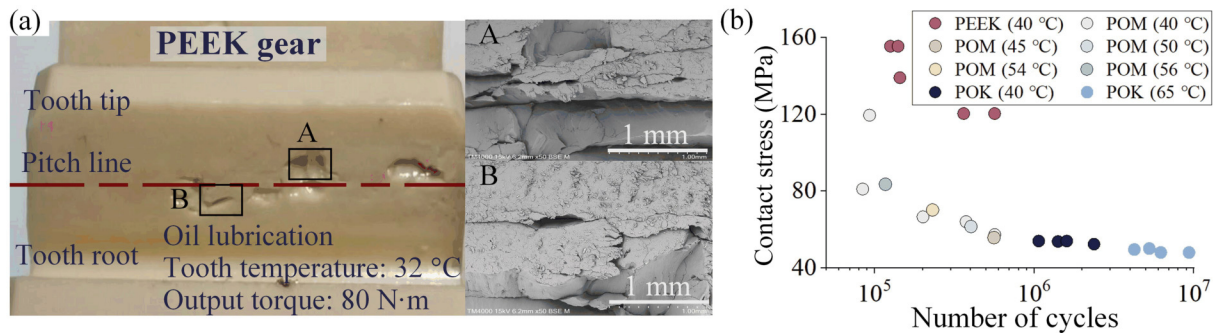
Contact fatigue failure of polymer gears: (a) tooth pitting failure and (b) contact fatigue S–N curves.
